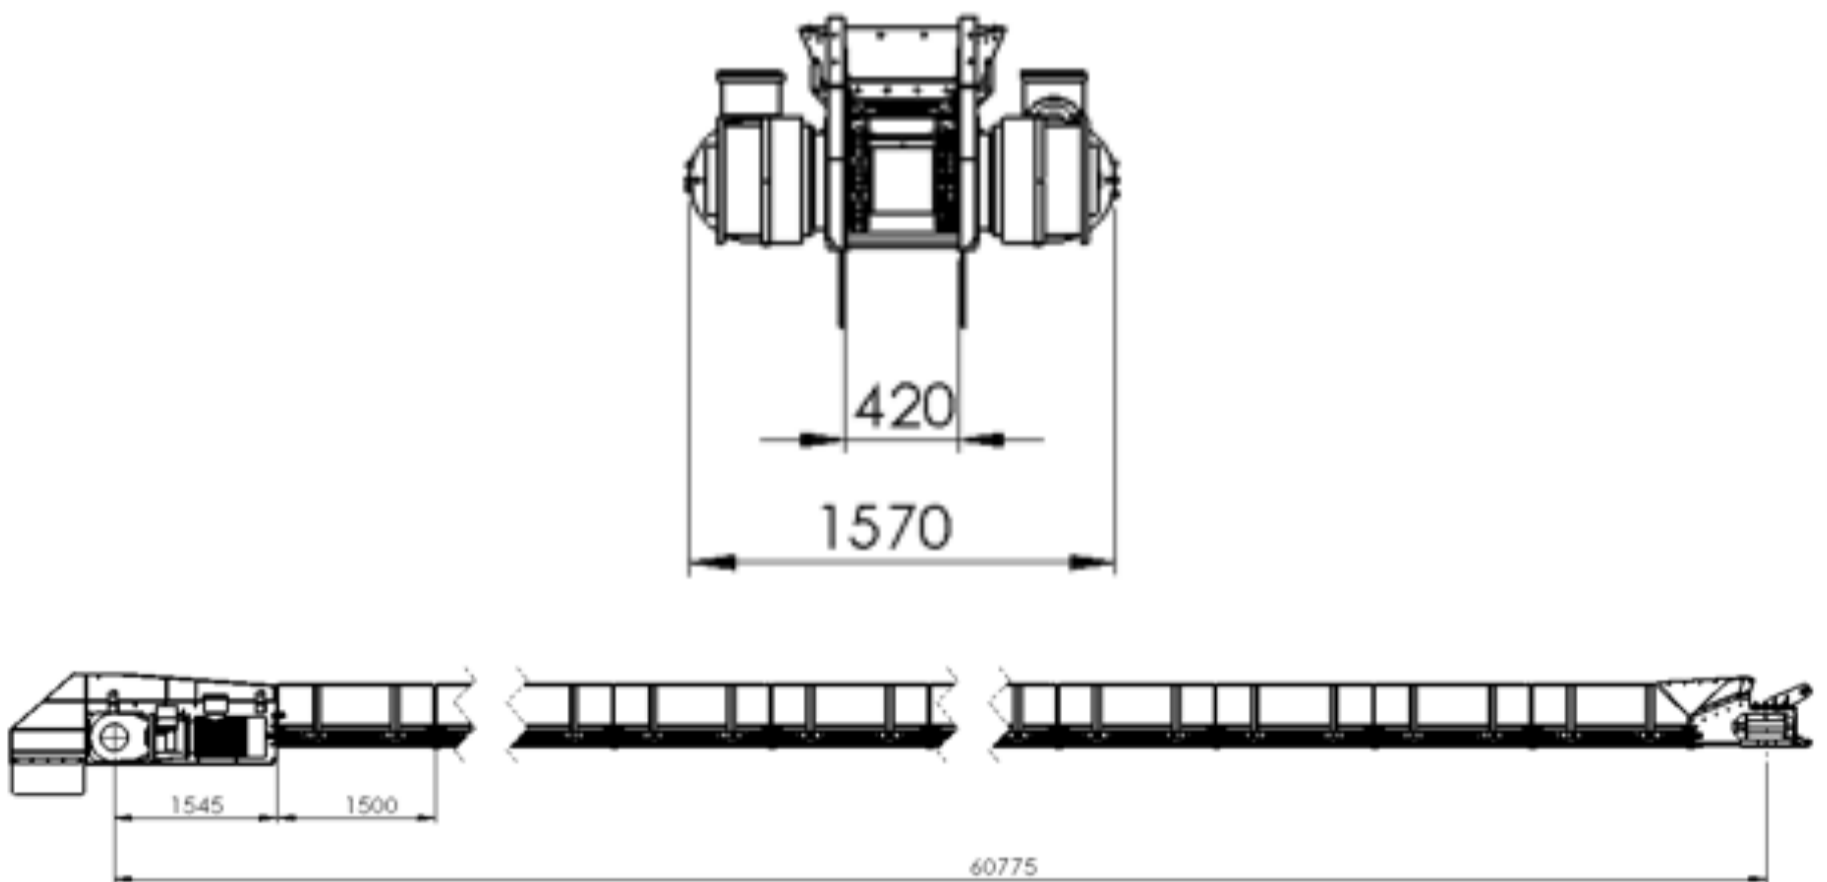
Project-440/E180 drag chain conveyor, 2x30 kW — overall envelope (GA) drawing.
